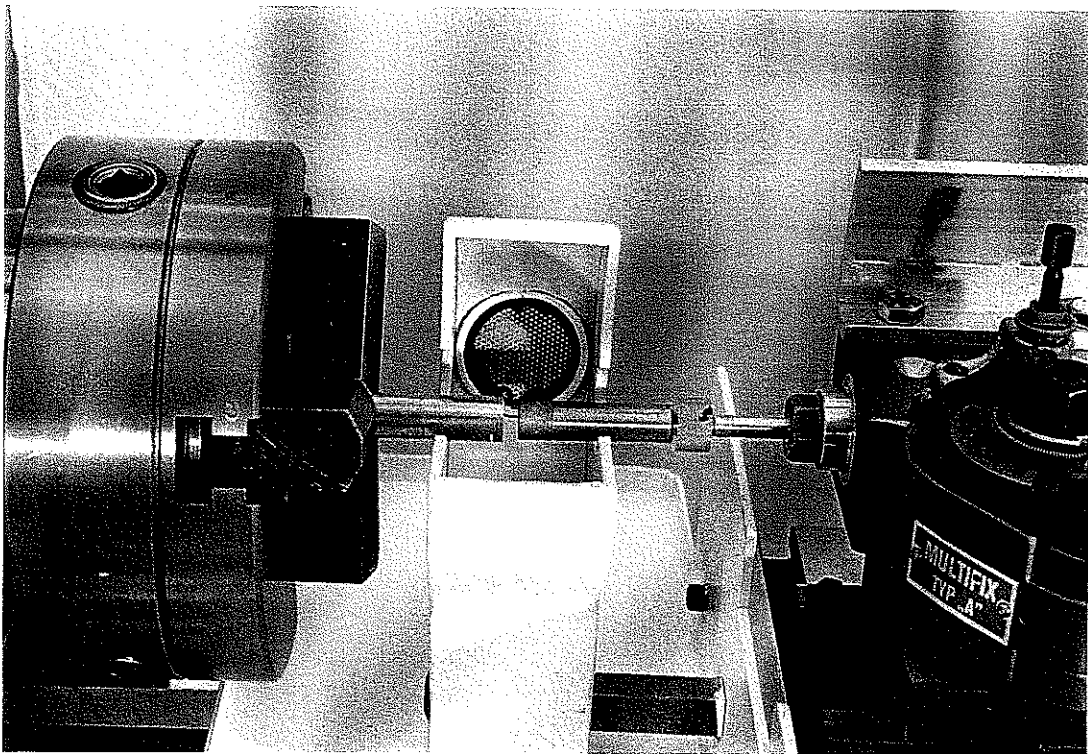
The Cutting and Grinding Unit, showing the diamond drill tube used for defuelling
